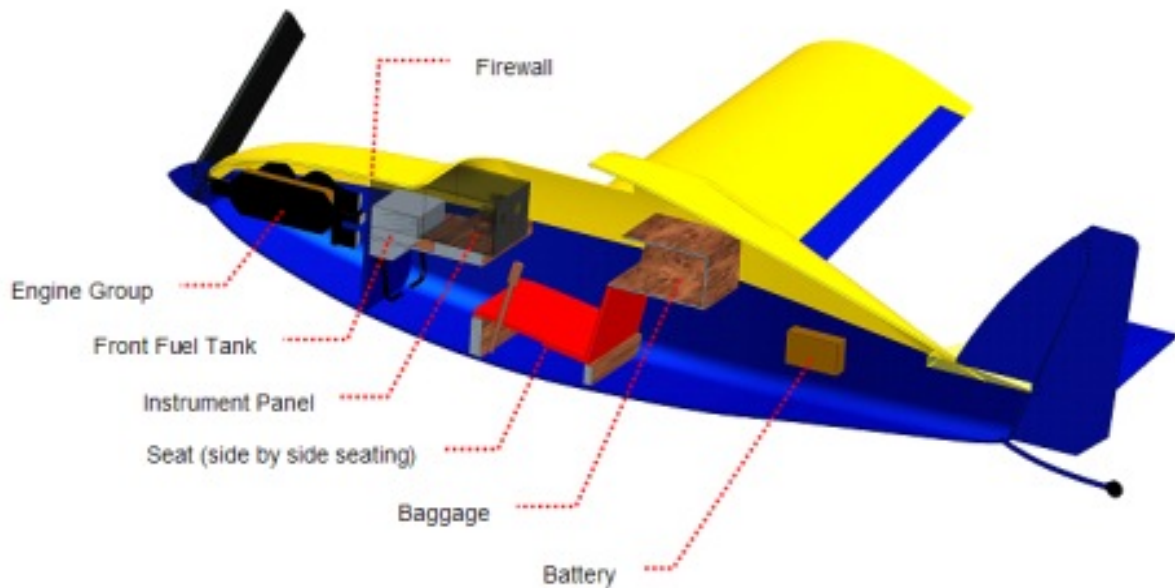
Cutaway View of Modified KR-2 Showing Component Placement
